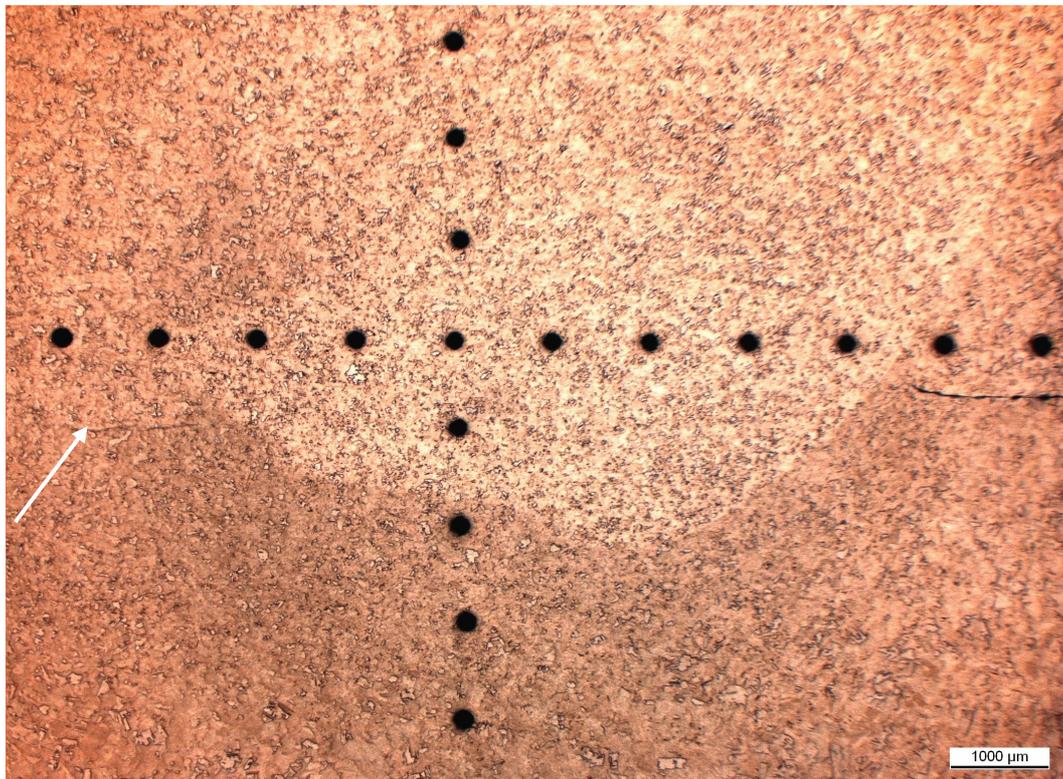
Weld defect (arrow) at the root of the FSW weld along the axial plane of the cylinder-cover joint. Tip of the joint gap is on the right below the row of hardness indentations.
